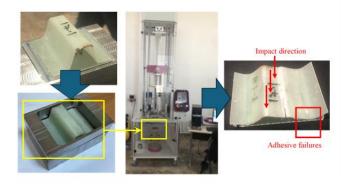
Initial Mold Design and the Damaged Specimen After Impact.
